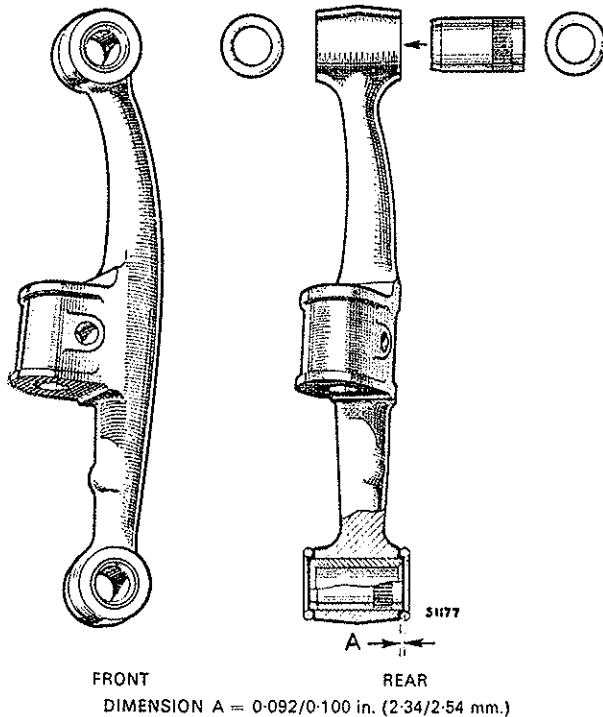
Fitting of threaded bushes to the stub axle carrier. The new bush is pressed in from the rear
